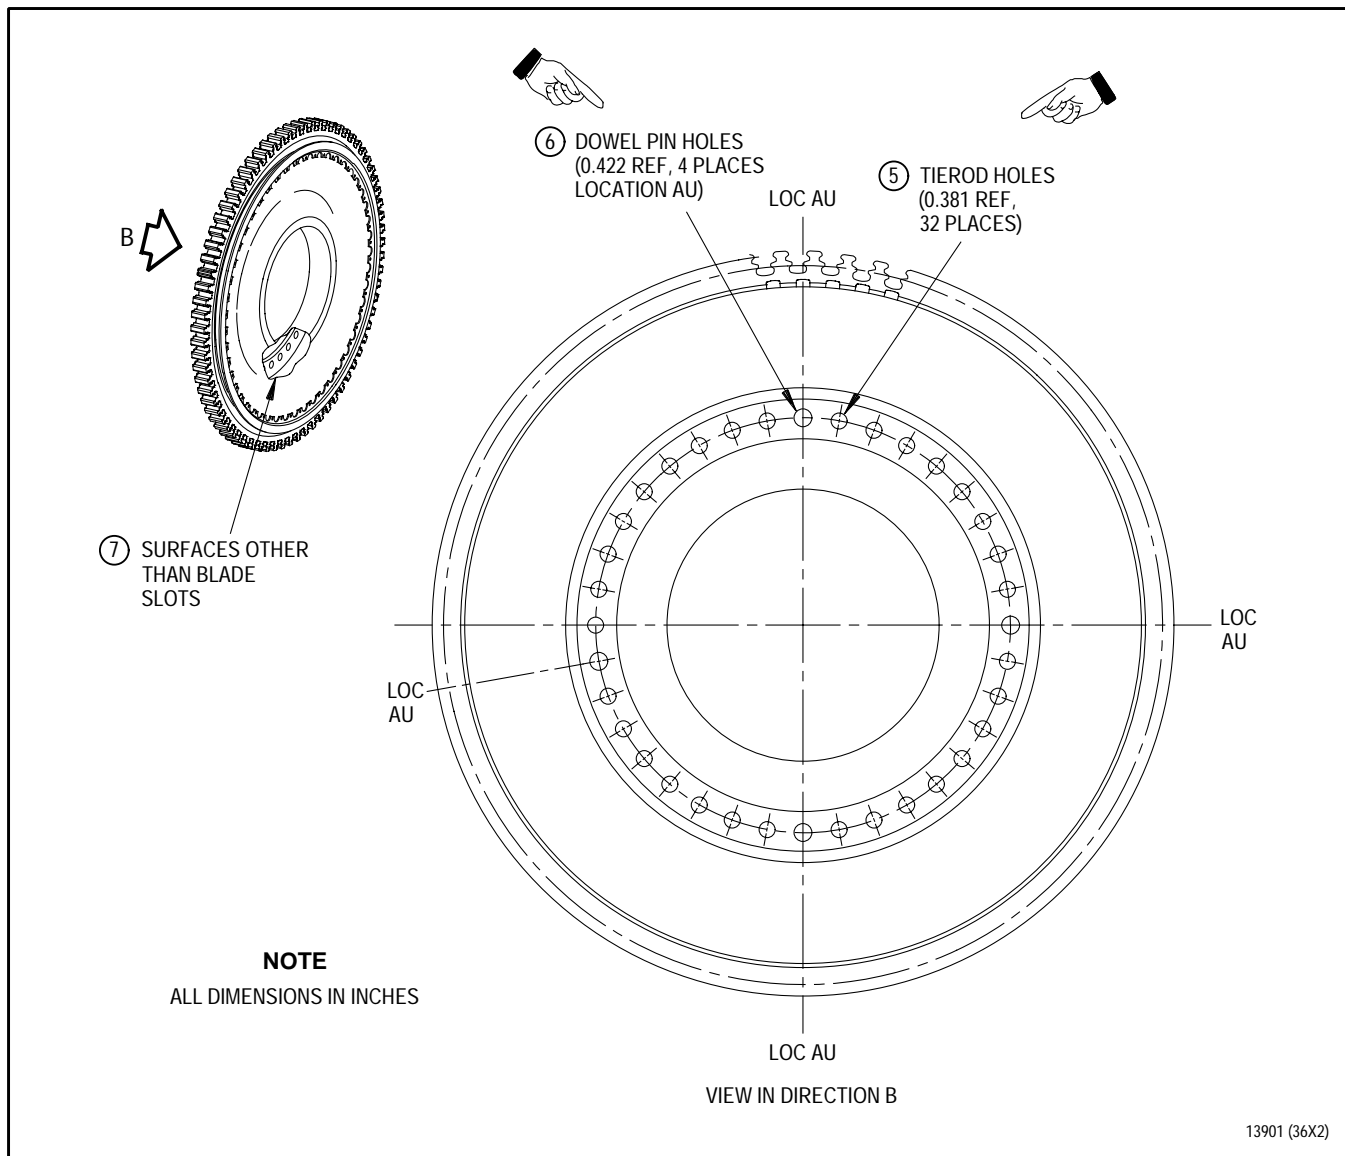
Second Stage Turbine Disk - Inspection (Sheet 3 of 3)
